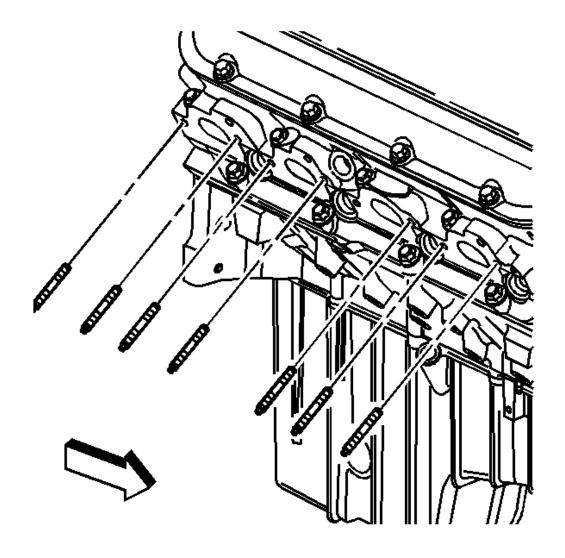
View Of Exhaust Manifold Studs Courtesy of GENERAL MOTORS CORP.
